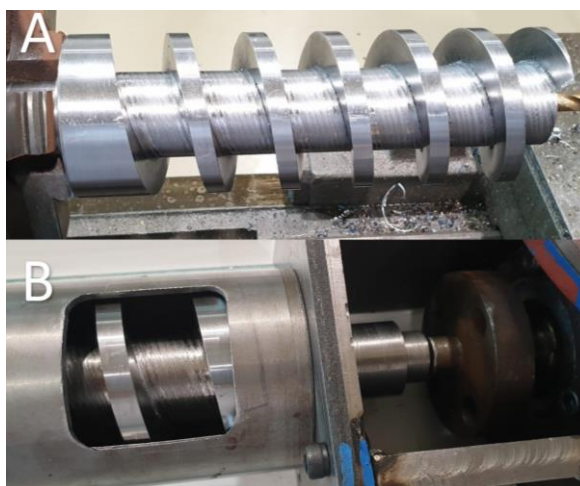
Screw conveyor (A) manufacturing lathe machine, (B) inside the cylindrical tube and connected to the motor
